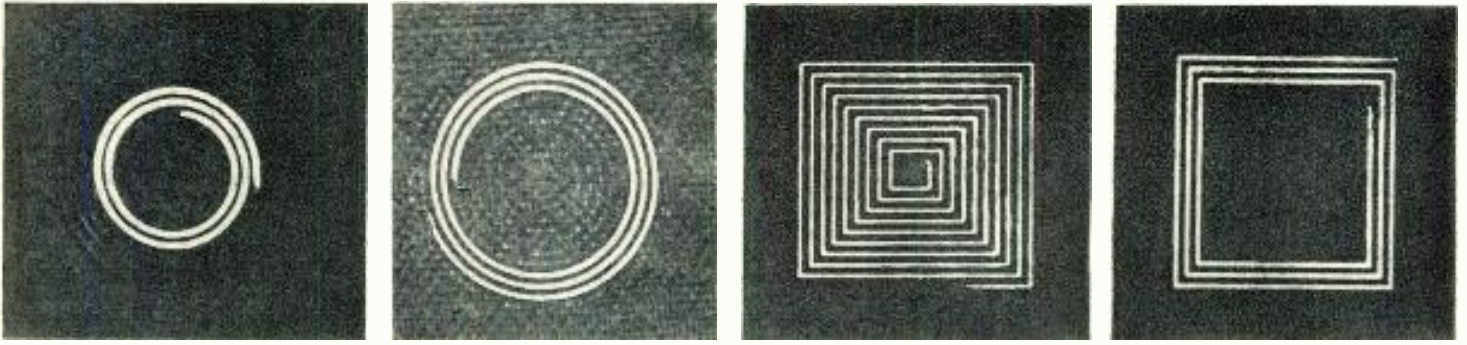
Typical coils produced by printed wiring techniques. Square coils, produced easier than spirals, are more desirable
